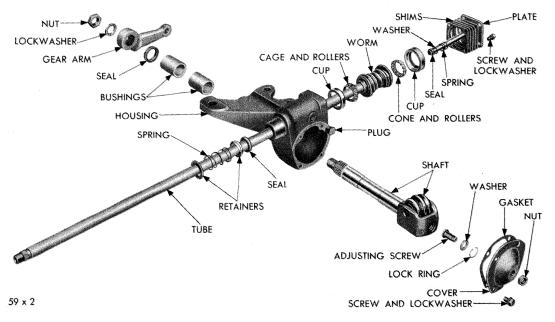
Manual Steering Gear Assembly (Disassembled View)
